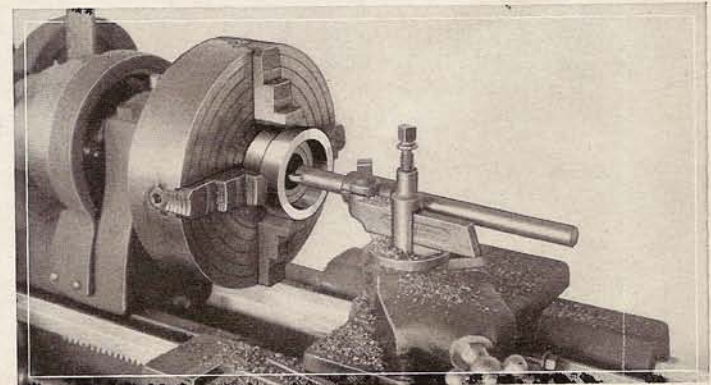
Boring a Hole Through a Cast Iron Gear Blank held in the Chuck of a No. 22—9-inch Junior Lathe
